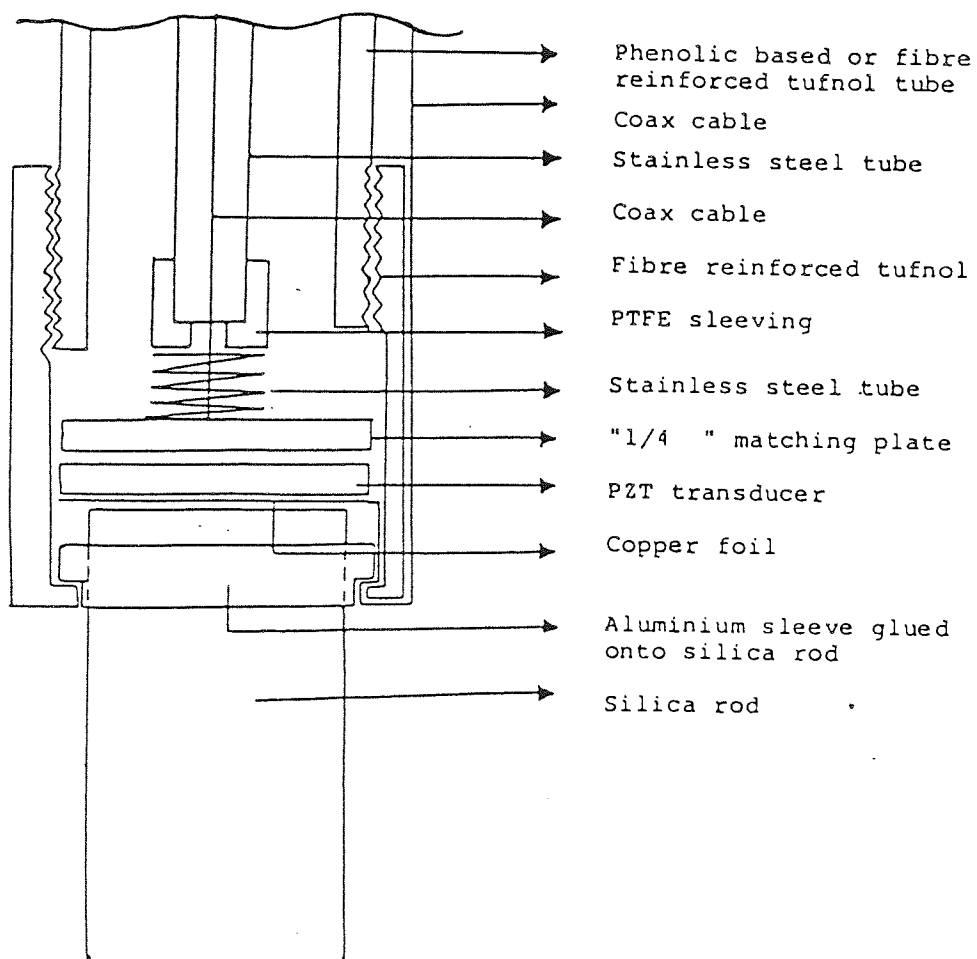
Transducer mountings constructed with fibre-reinforced tubes and a silica rod; with a compressional spring type fittings.
